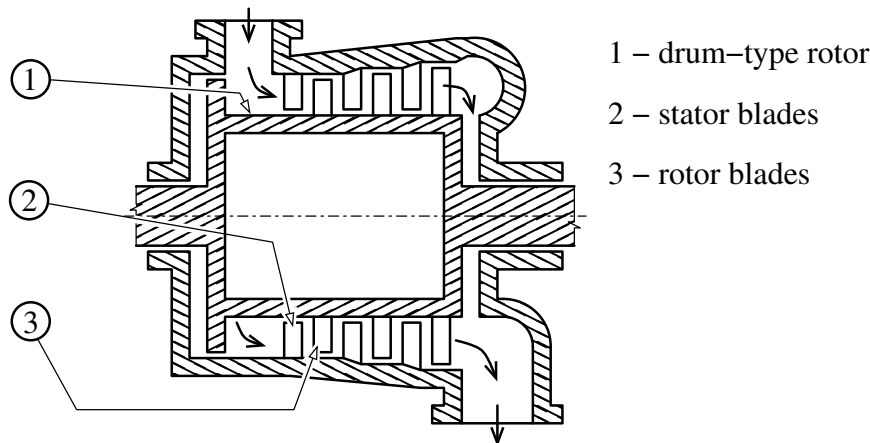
Scheme of the low power axial steam turbine with the drum-type rotor.
